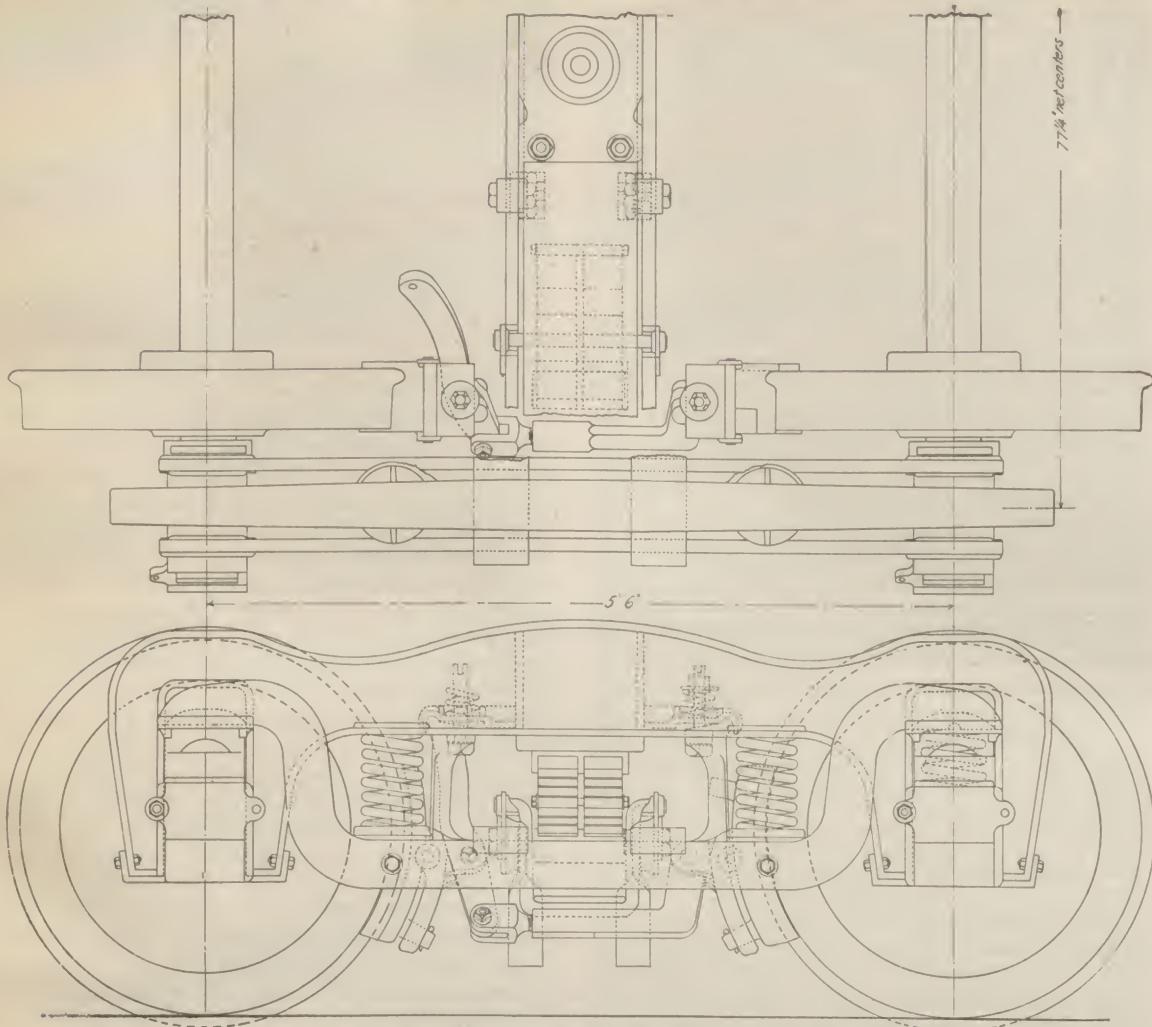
SIDE ELEVATION AND HALF PLAN SHOWING BRAKE ATTACHMENT.
